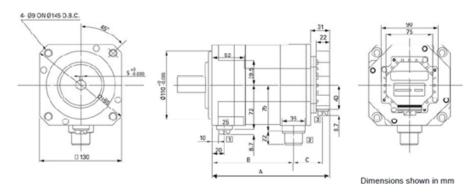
α4/5000HVis Series Servo Motor Outline Drawing
